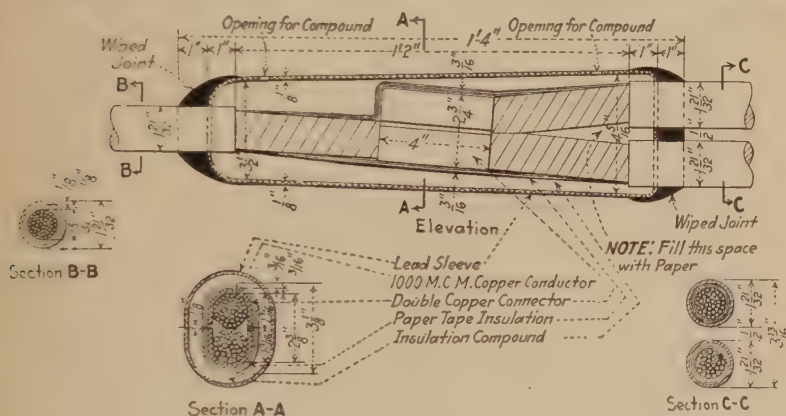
Drawing of 1,000,000 cir. mil branch cable splice.
